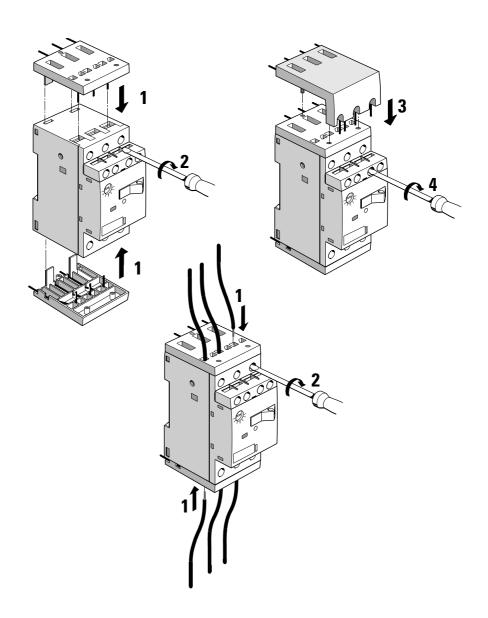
Circuit breaker/MSP, soldering pin connector (frame size S00)
